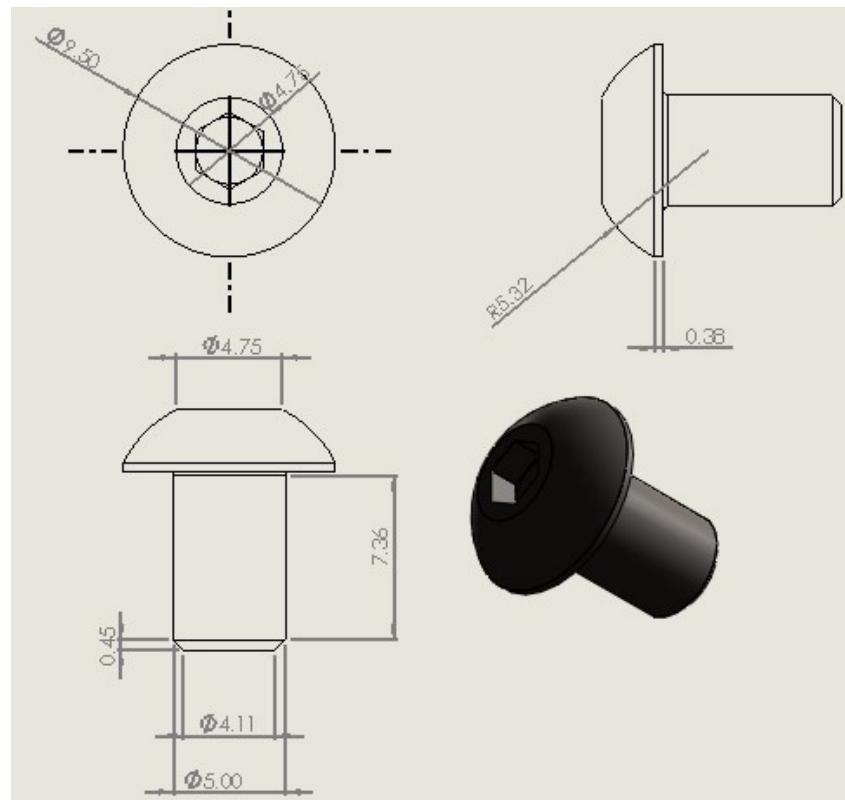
Bolt Design Made Using SolidWorks 2022
